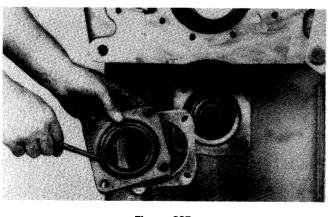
Coat outer diameter of front output oil seal with Permatex No. 2. Install seal in bearing cap with lip of seal in.
